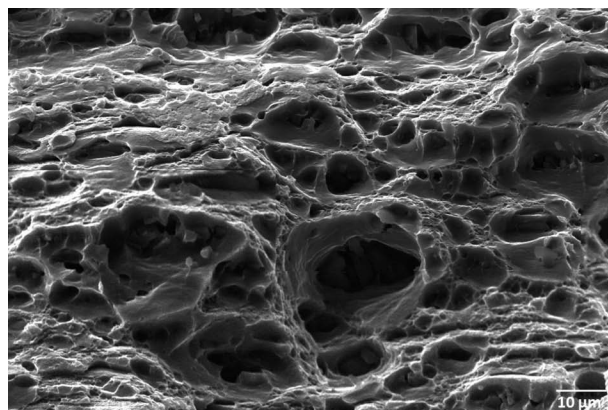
Higher magnified image of the fracture surface shown in Fig. 102
